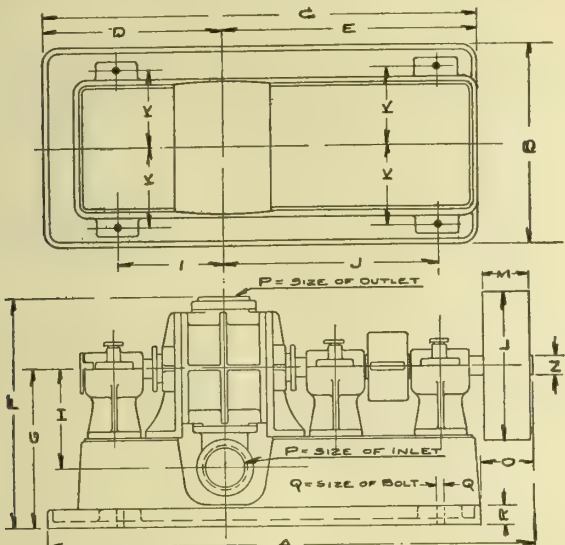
DIMENSIONS, BELT-DRIVEN VACUUM PUMPS
